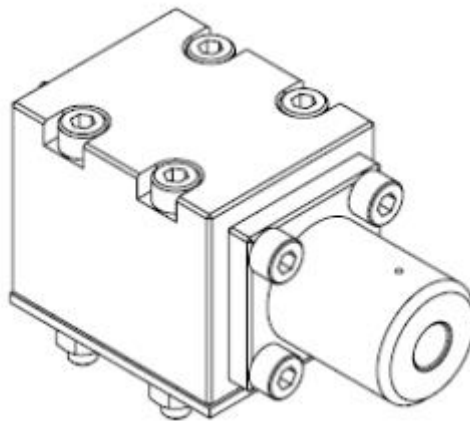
Typical Assembly of the 3B25M-H1 Hydraulic Operated Valve
